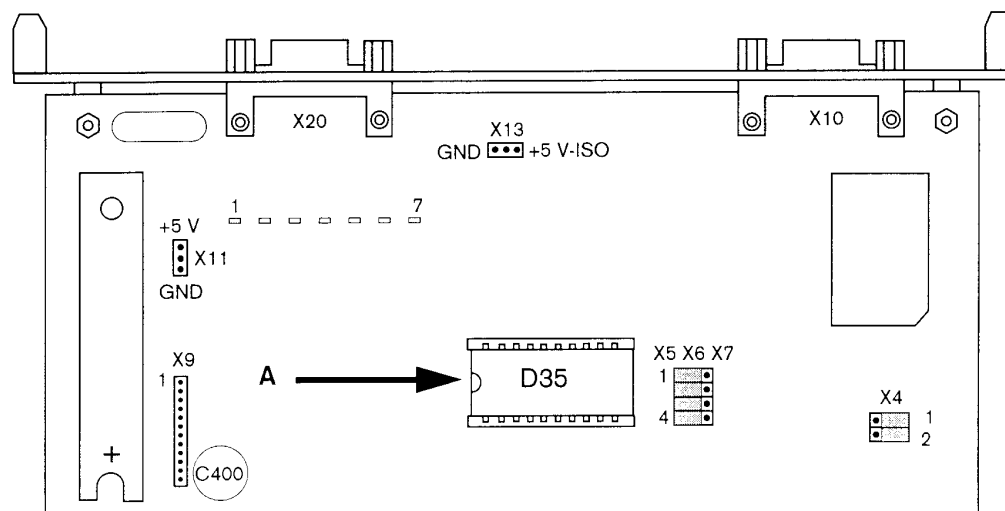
Component mounting diagram CPU PCB (replacing the real-time clock)
